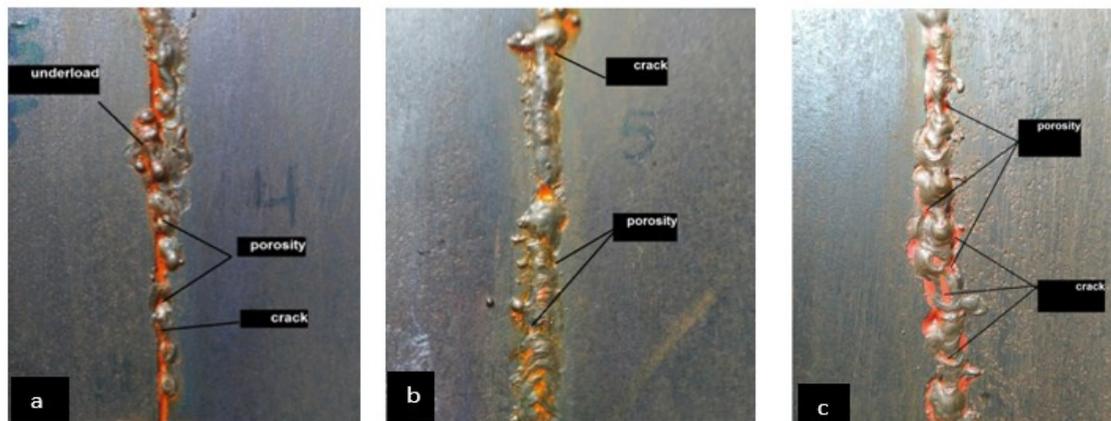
Welding defects at (a) A=255, S=112 (b) A=255, S=118 (c) A=255, S=123.
